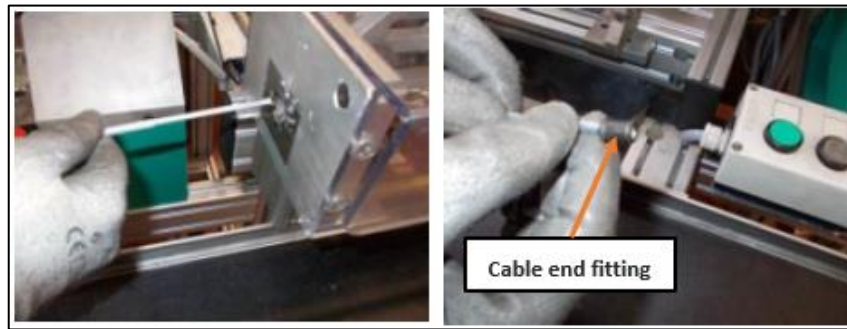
Operator introducing the cable on a strip dispositive (left) and introducing the cable end fitting (right)
